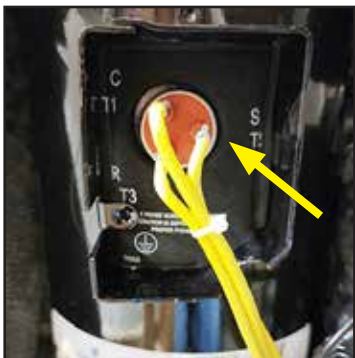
Connect compressor wires #59, #60 and #61 to 4MOL overload.
